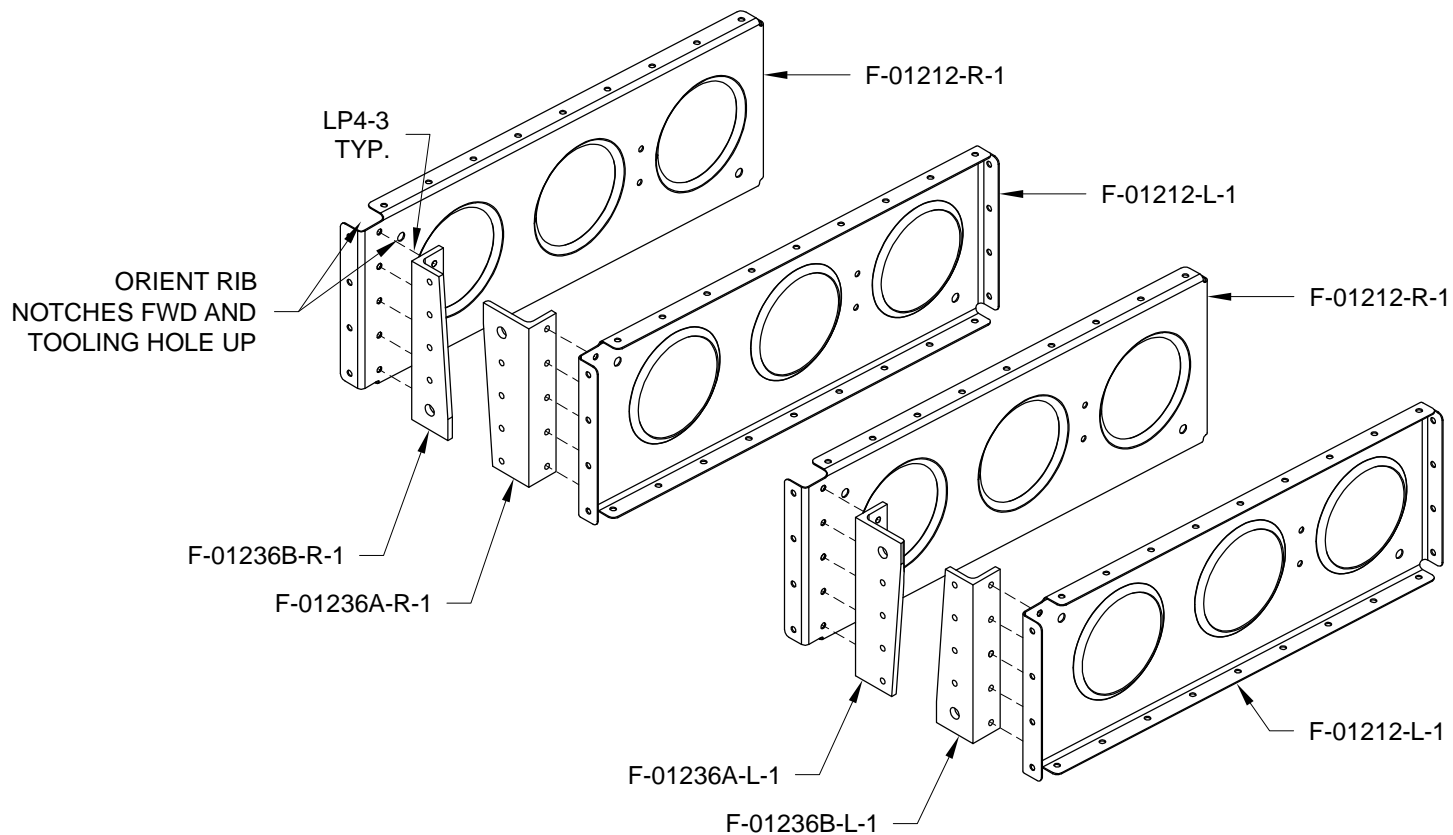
RIVETING STEP RIB ASSEMBLIES
